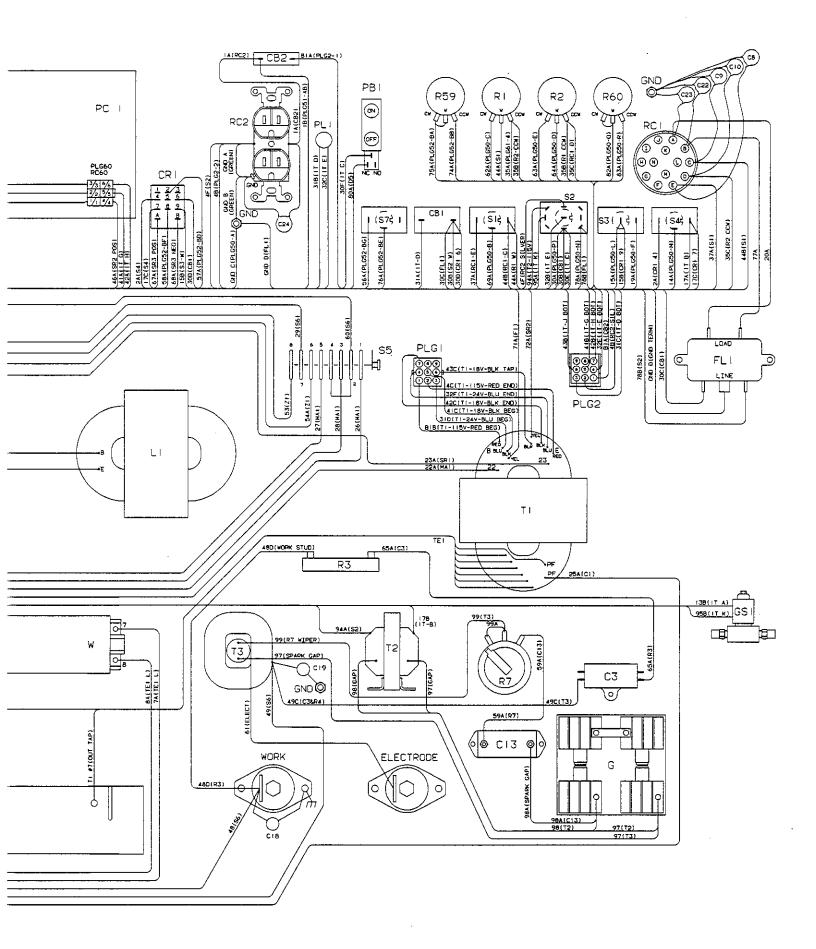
Wiring Diagram For Welding Power Source
